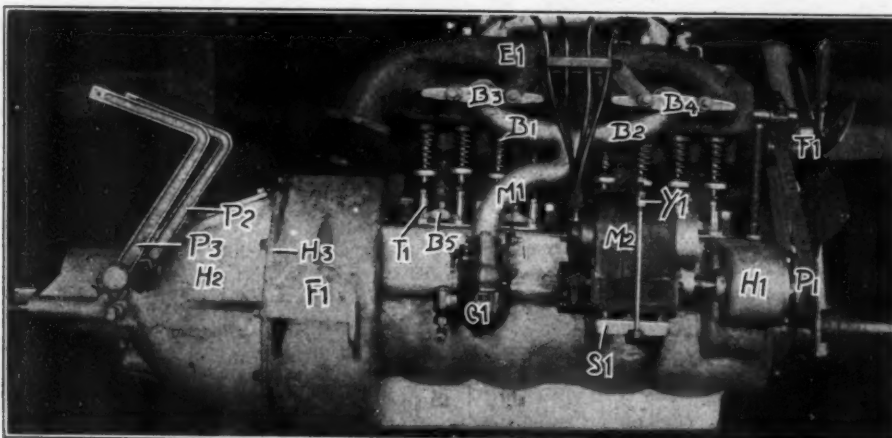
Marathon motor showing a self-contained motor, magneto and carbureter
